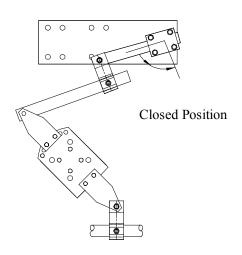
PUSHING SWITCH OPEN (SHOWN IN CLOSED POSITION)
